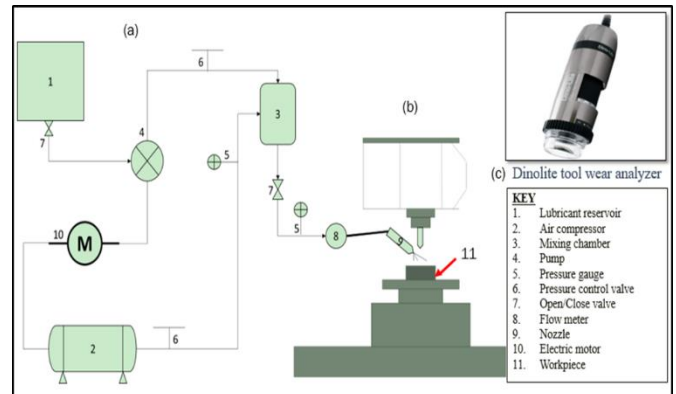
The Schematic Diagram of the experimental setup (a) the MQL system, (b) the Milling Machining process, (c) the tool wear measurement system
